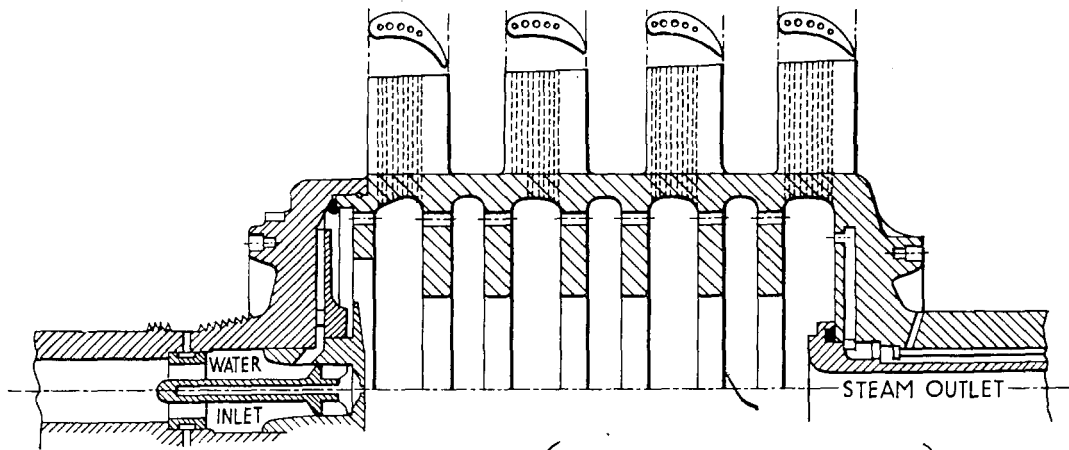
SCHMIDT ROTOR (STEAM GENERATED IN BLADES)
